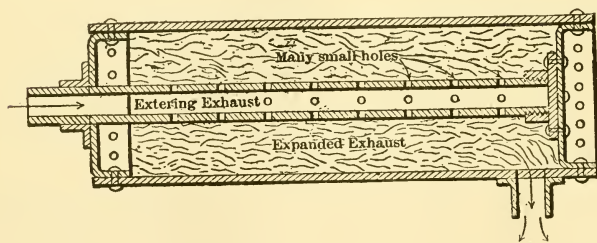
A simple form of muffler, as used on many cars, and which gives good satisfaction when well designed. It consists of a cylinder and a pipe so contrived that the pipe, which is drilled full of small holes, will admit the exhaust at high pressure, and as it is required to pass through a large number of small holes, it is split up and then expanded. The gas passes to the atmosphere in an uneven flow, at a pressure slightly above that of the atmosphere. This type of muffler is fairly efficient when well designed.
